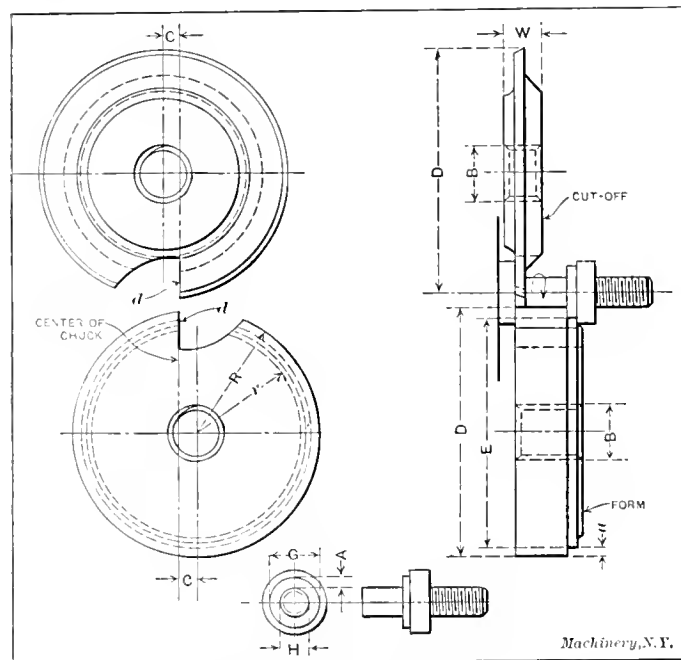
Diagram showing Principal Dimensions of Circular Form Tools
